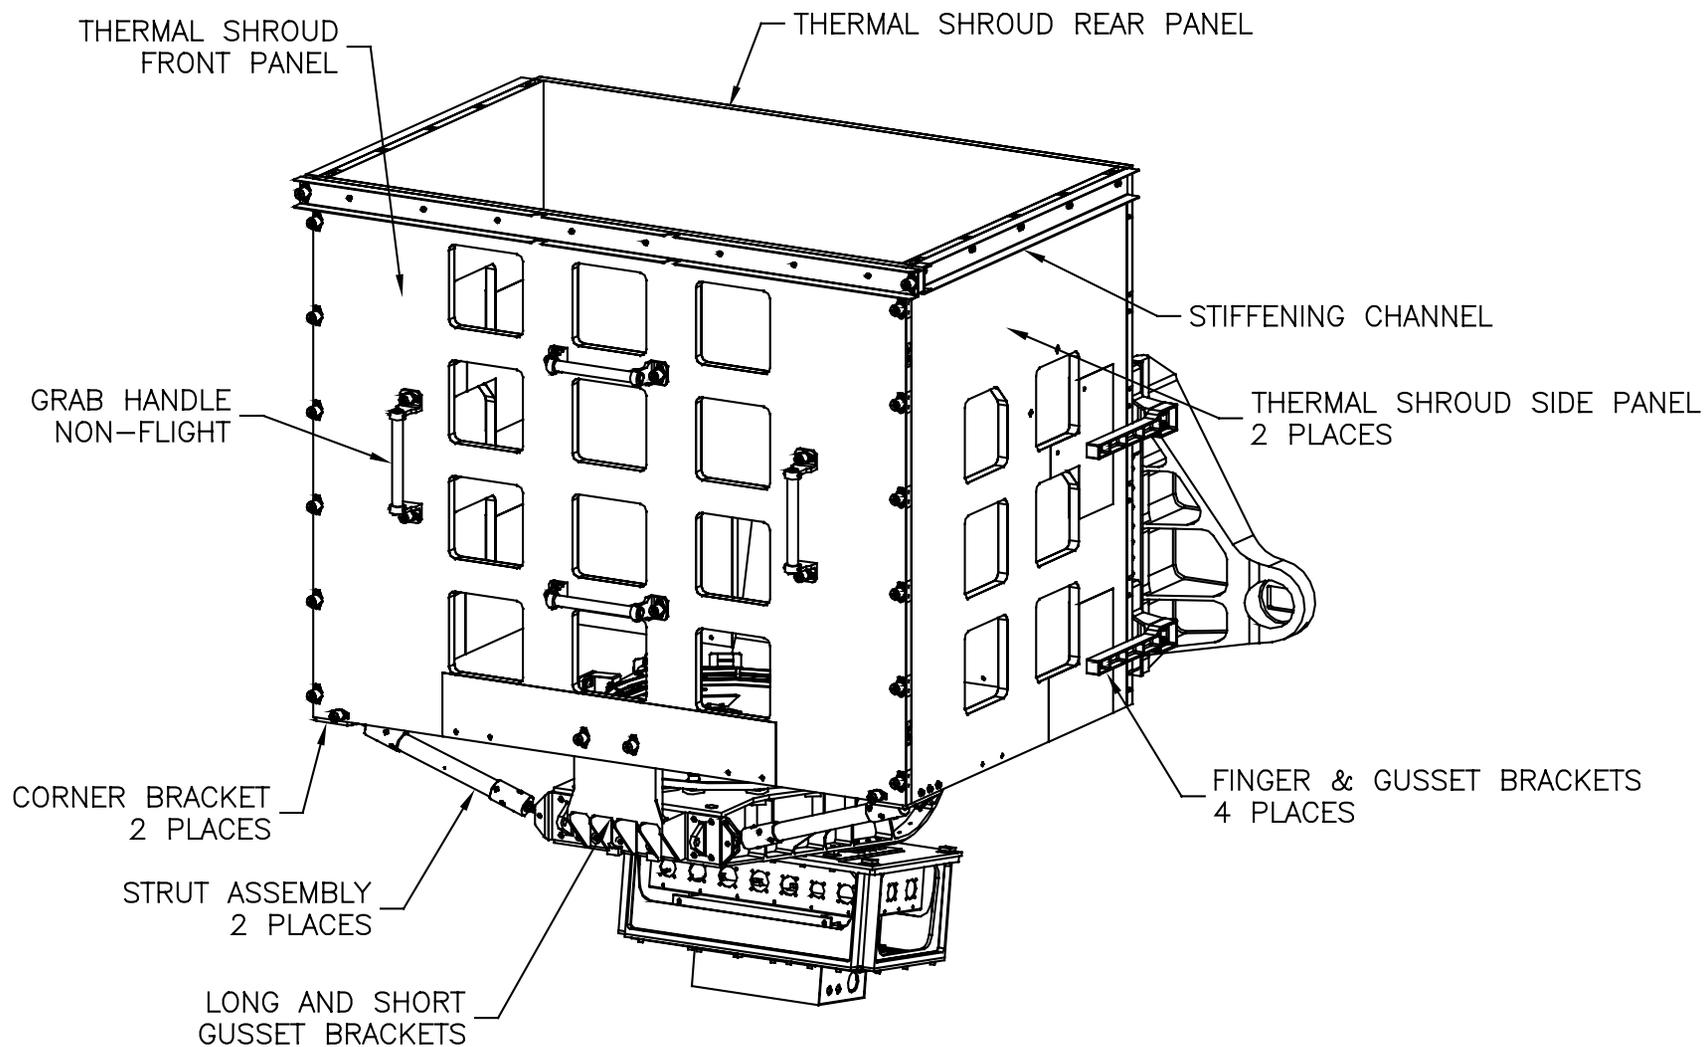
Thermal Shroud Mounted in Sidewall Configuration
